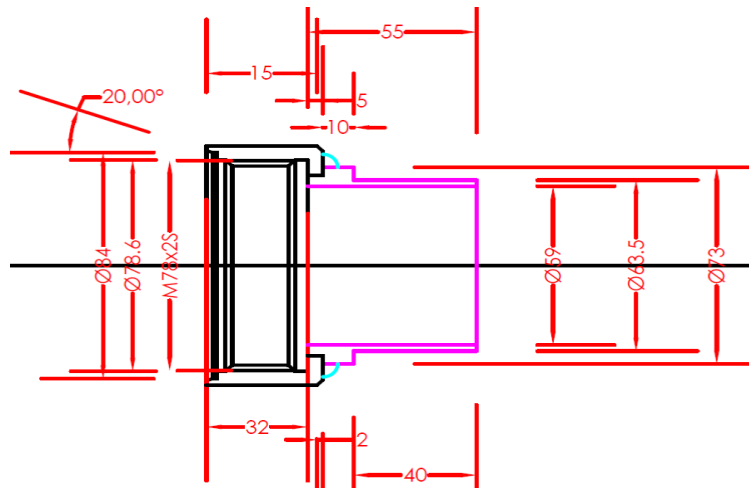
Connection piece (female threaded) from external tube to head. (image courtesy of Hydra srl).
